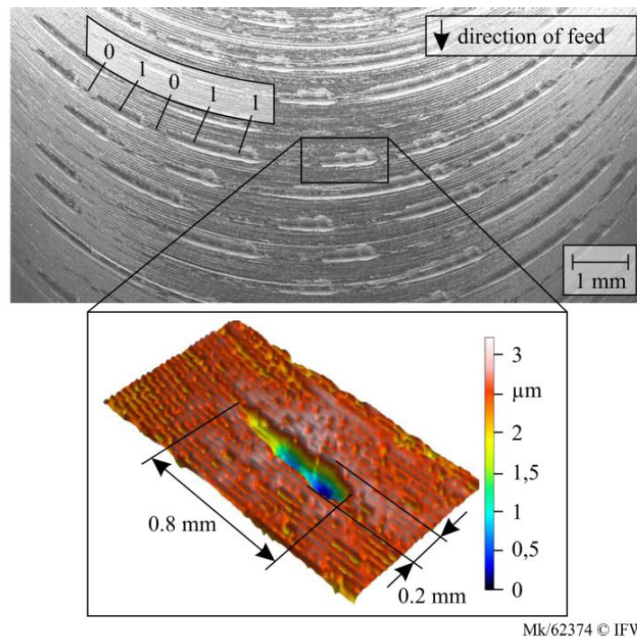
Machined micro patterns for information storage on the component surface [2].
